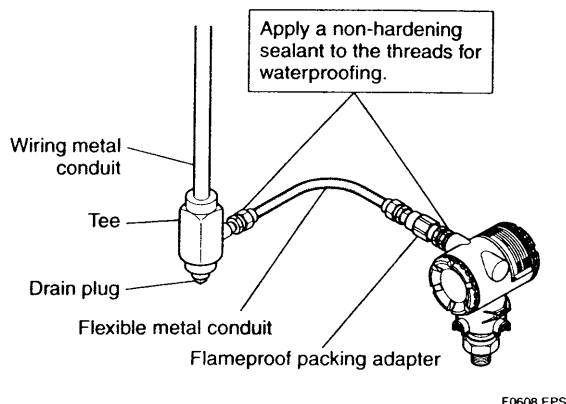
Typical Cable Wiring Using Flameproof Packing Adapter
